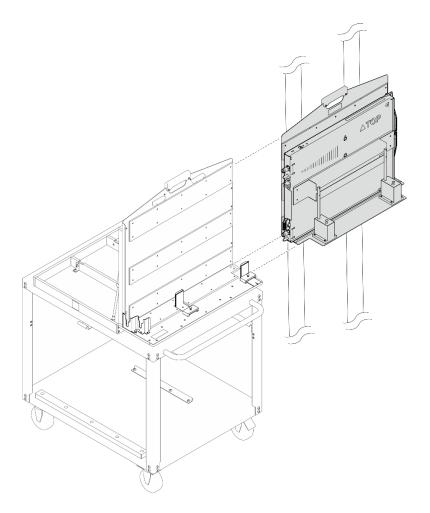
Aligning lift tool fixture and rotate fixture bottoms and sides
